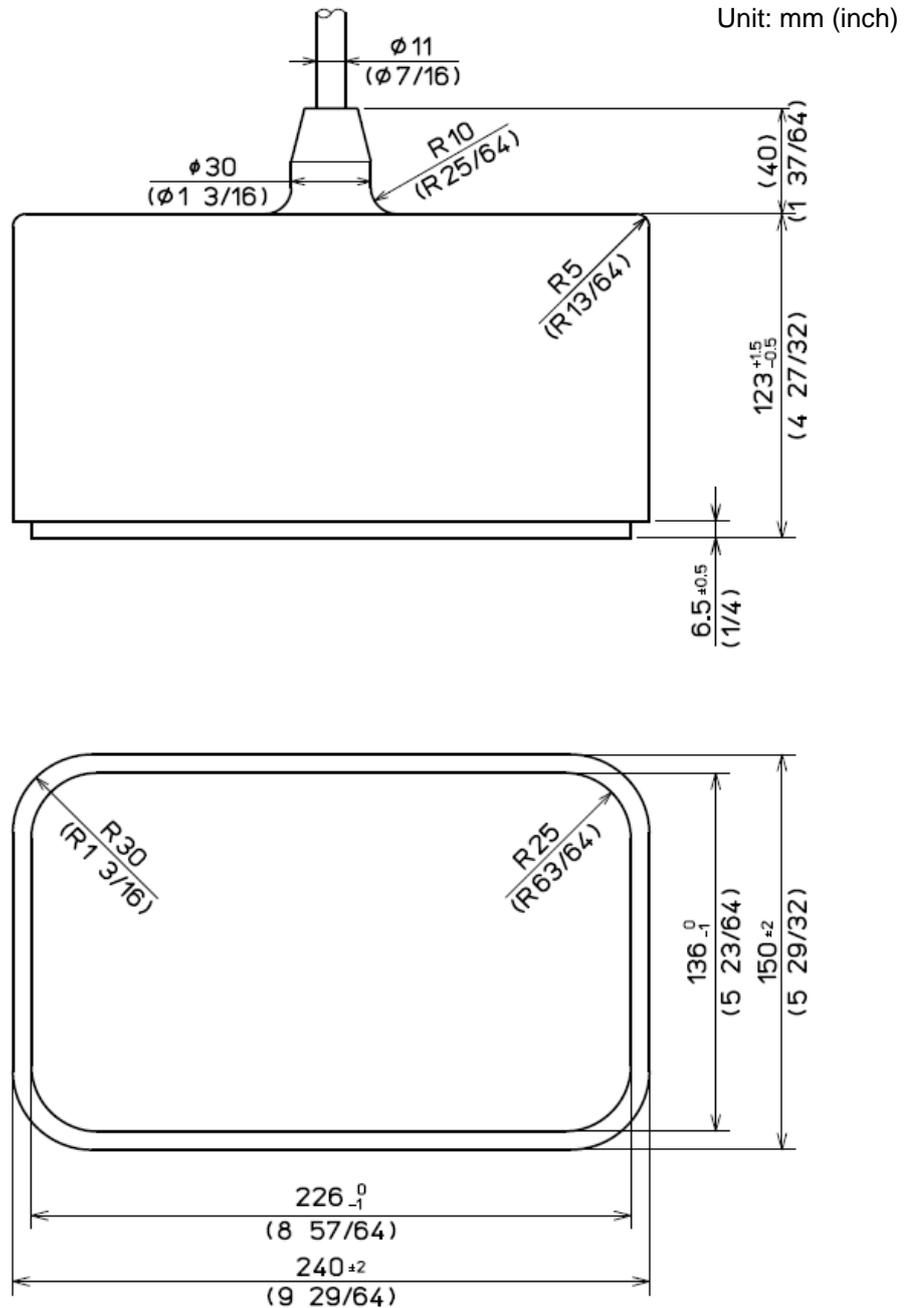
Outline dimensions of a transducer (TD-284/284A/TD-404T/TD-504T/ TD-504F)
